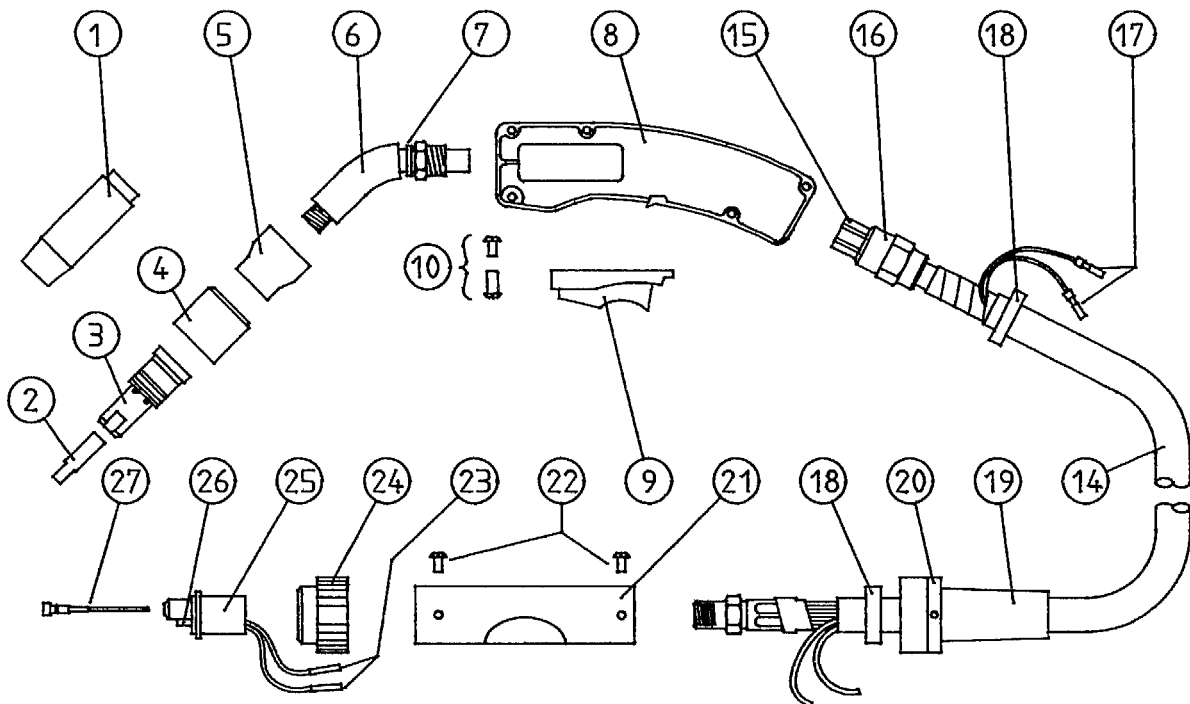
BEXT2-4E210AE GUN & CABLE ASSEMBLY
